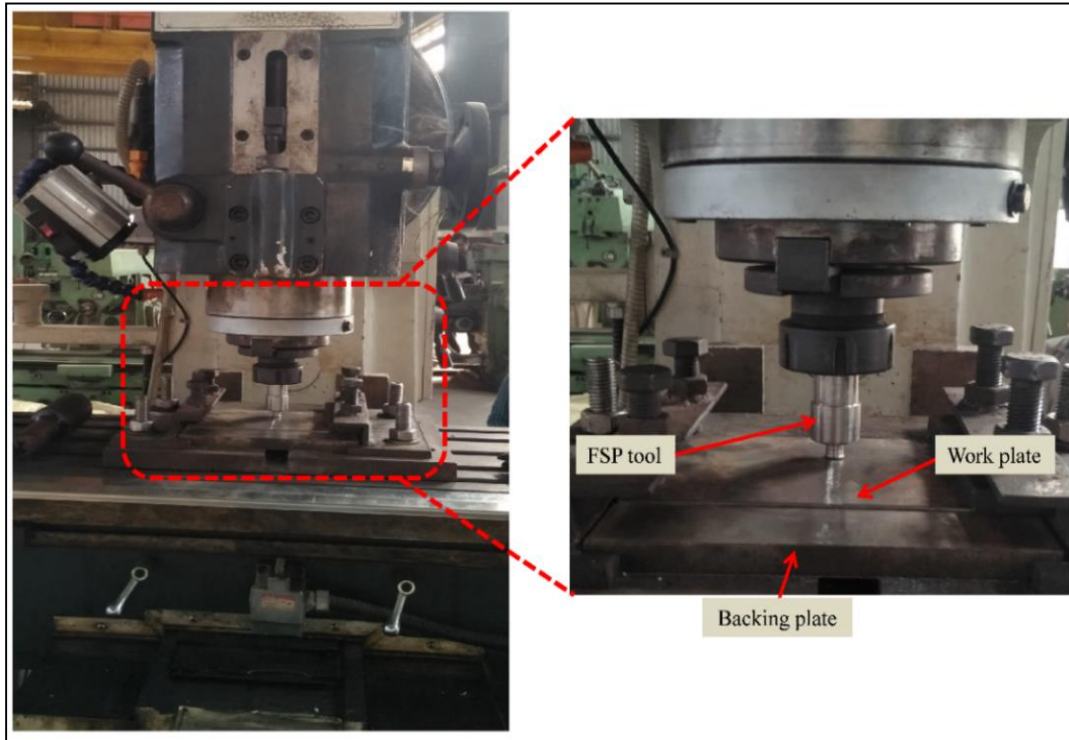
Photograph of friction stir welding (FSW) machine
